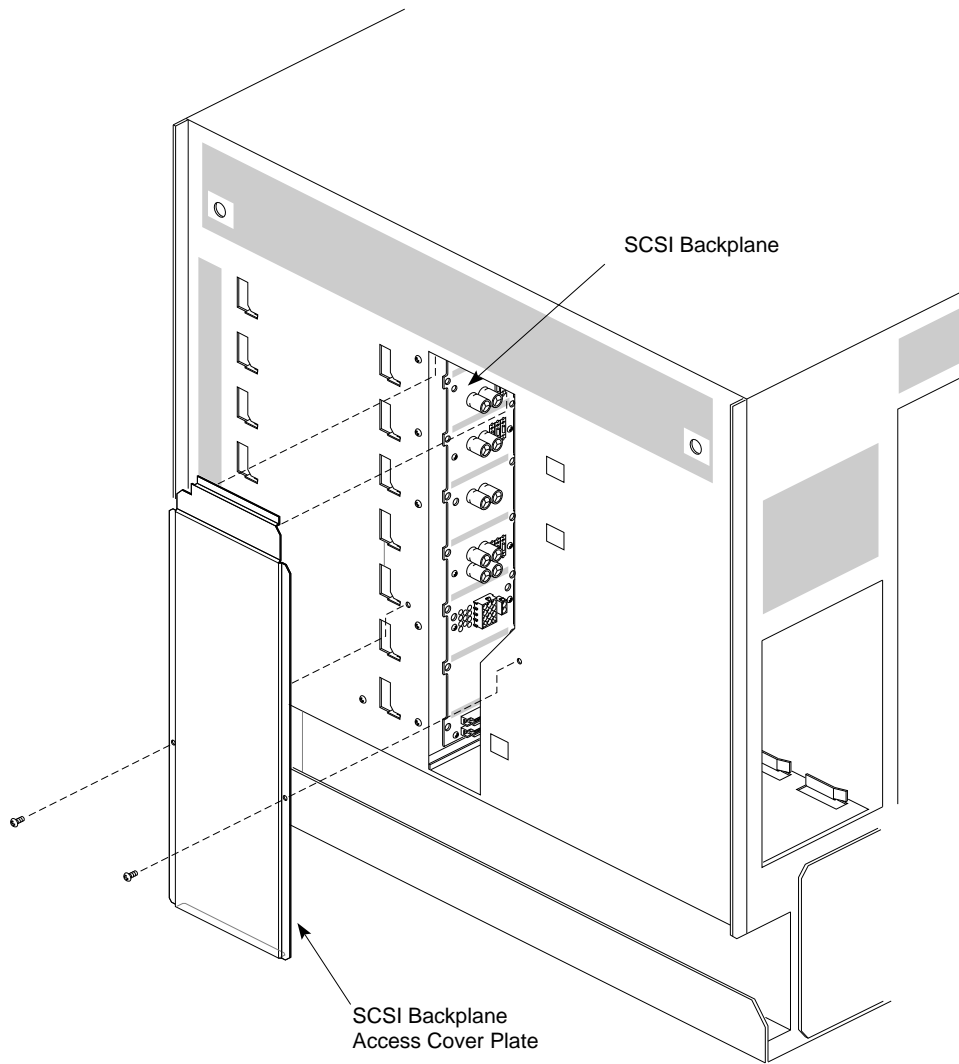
Removing the SCSI Backplane Access Cover Plate
